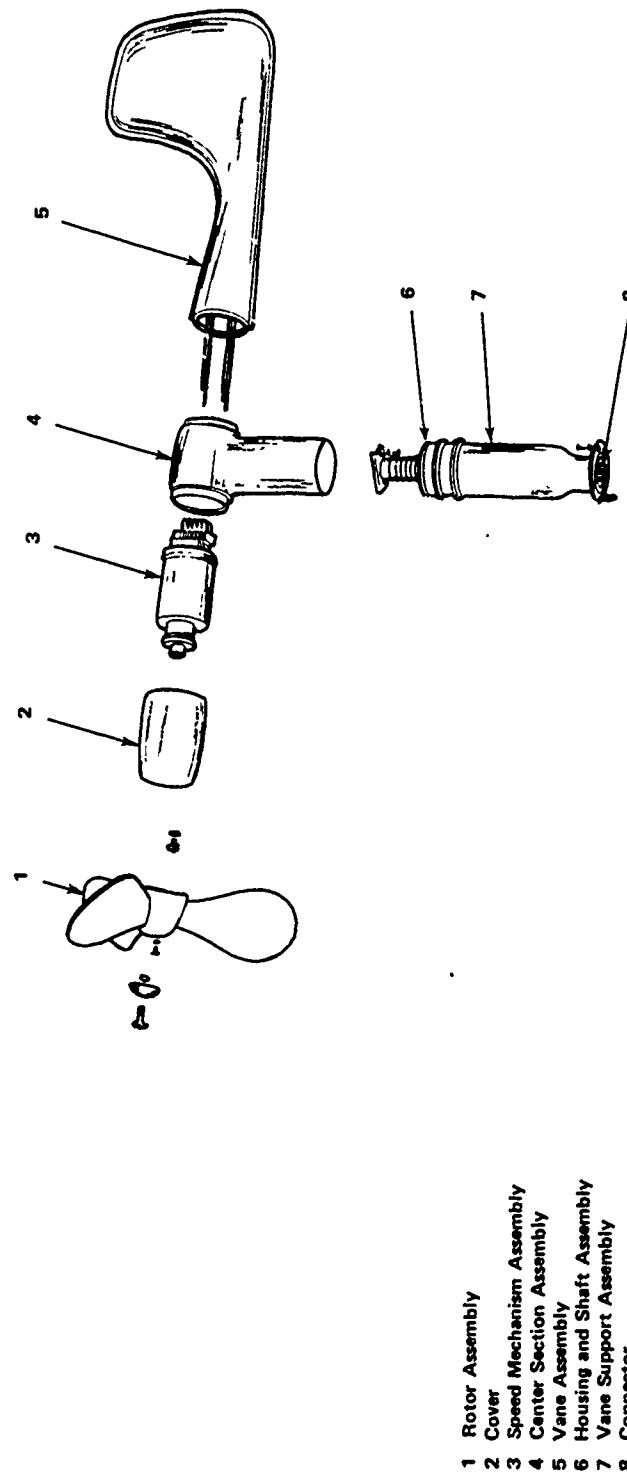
DETECTOR UNIT, TYPE F (EXPLODED VIEW)
